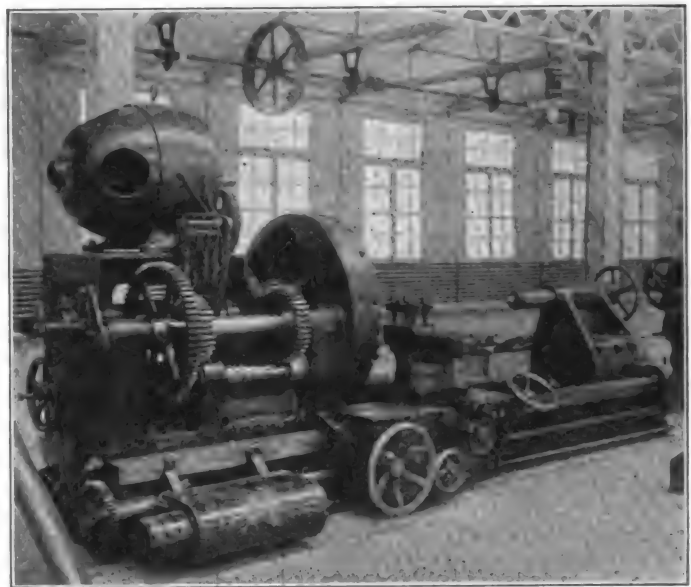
APPLICATION OF MOTOR DRIVE TO A HEAVY LATHE.
